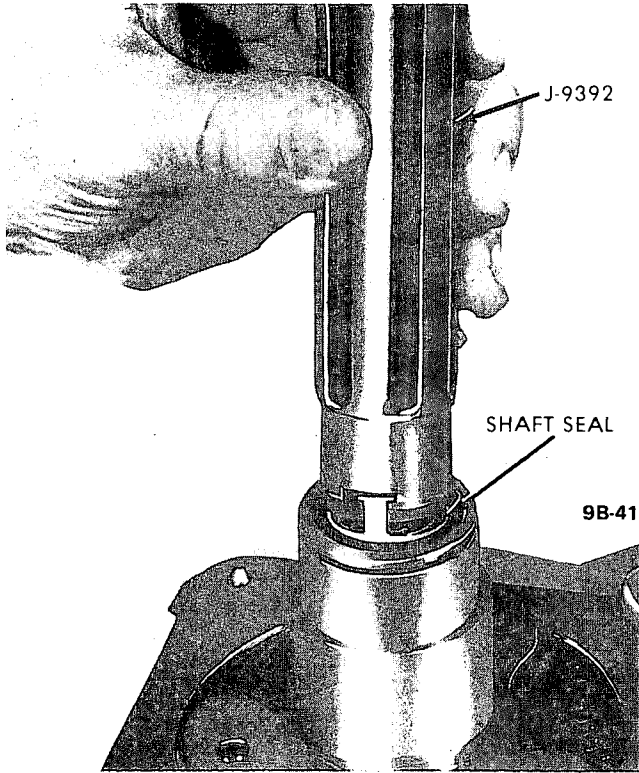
B-64 Removing or Installing Shaft Seal - 6 Cylinder Compressor
